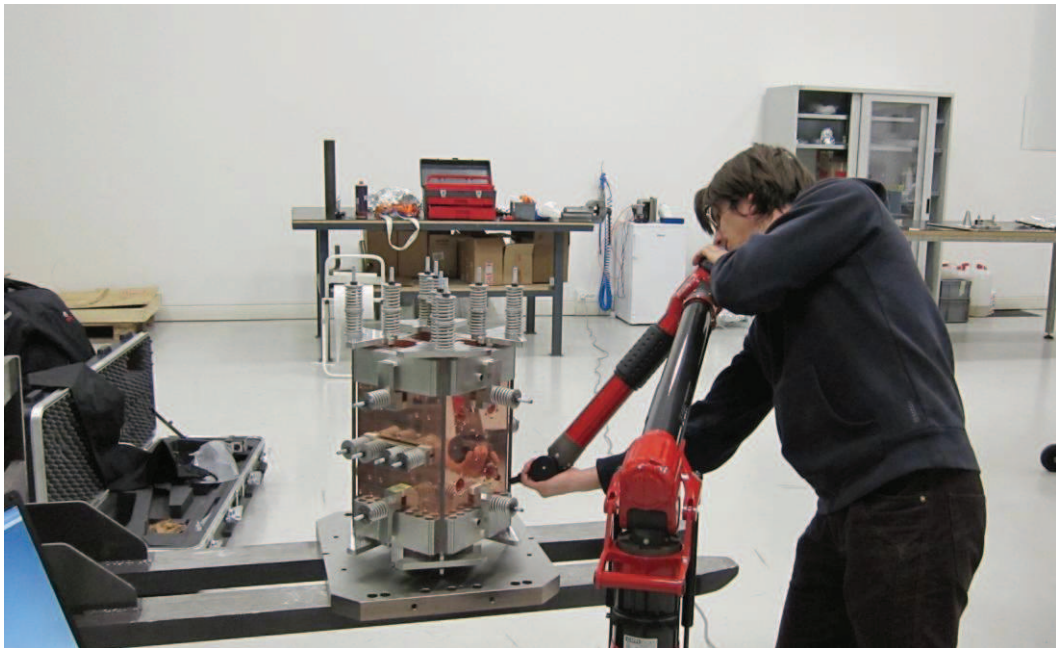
A prototype under dimensional inspection by means the PCMM.
